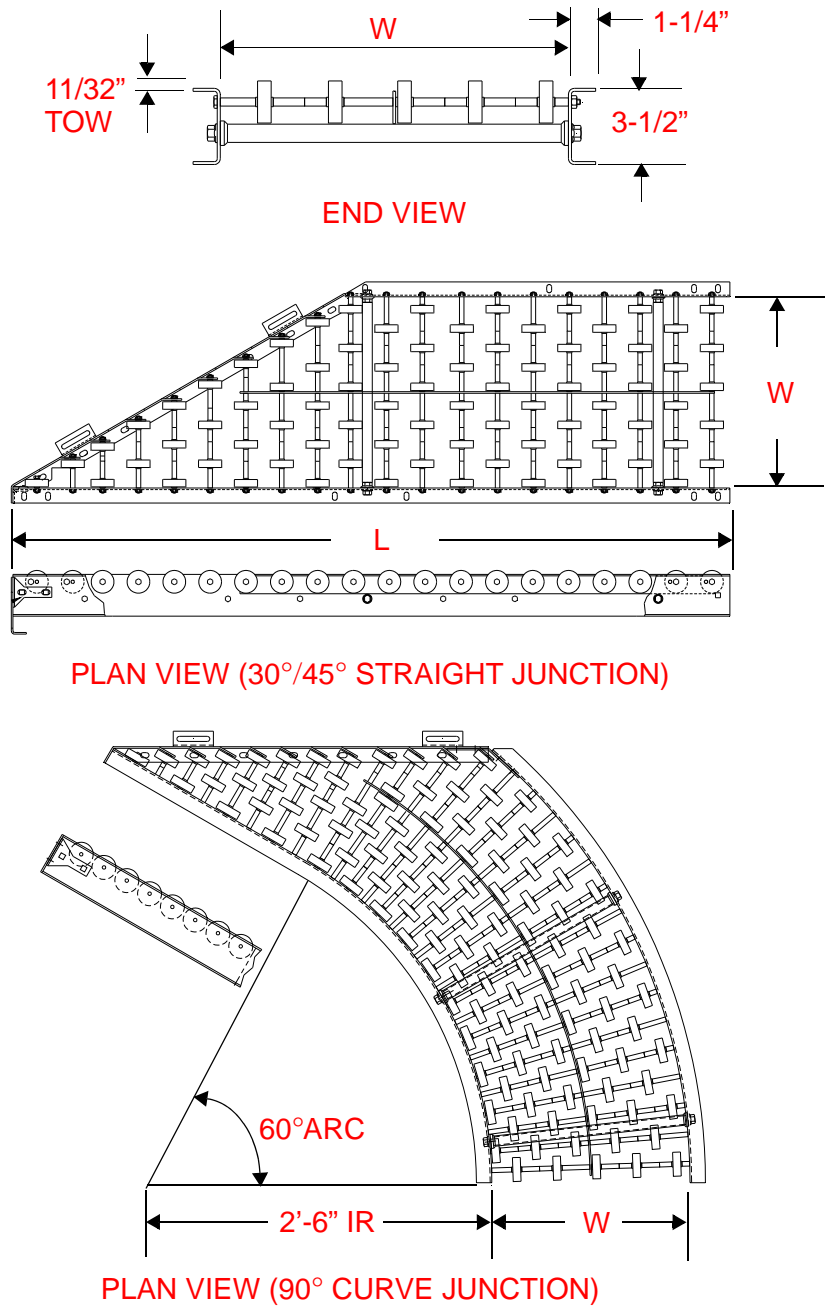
Medium Duty Wheel Conveyor - Junctions (LMRD Assembly Shown)
